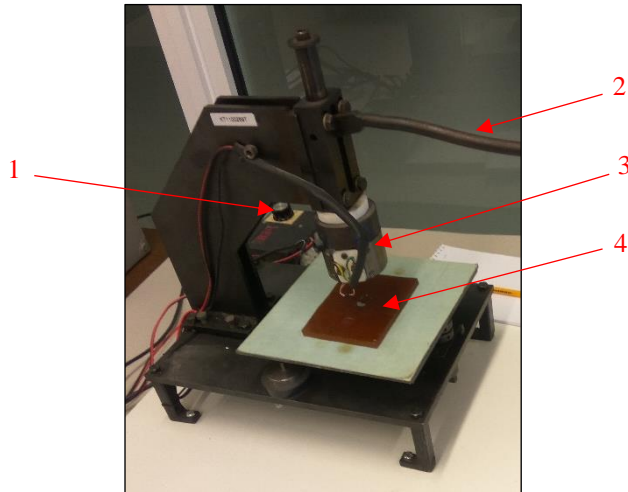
Hot stamping machine (1 - Temperature regulator; 2 - Press Lever; 3 - Stamping Die; 4 - Stamping Bed)
